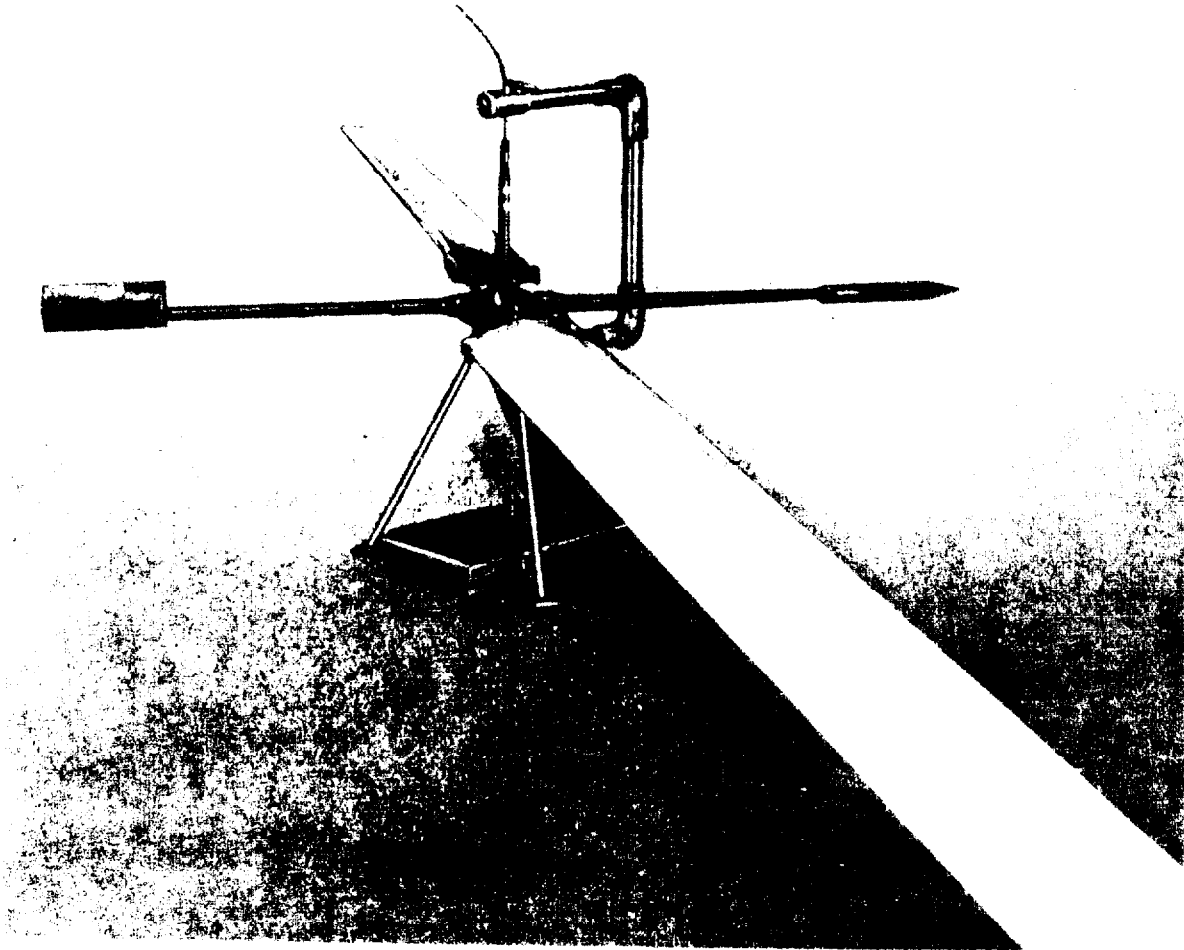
Typical Balance Checking Set-Up - Helicopter Main Rotor Assembly.
